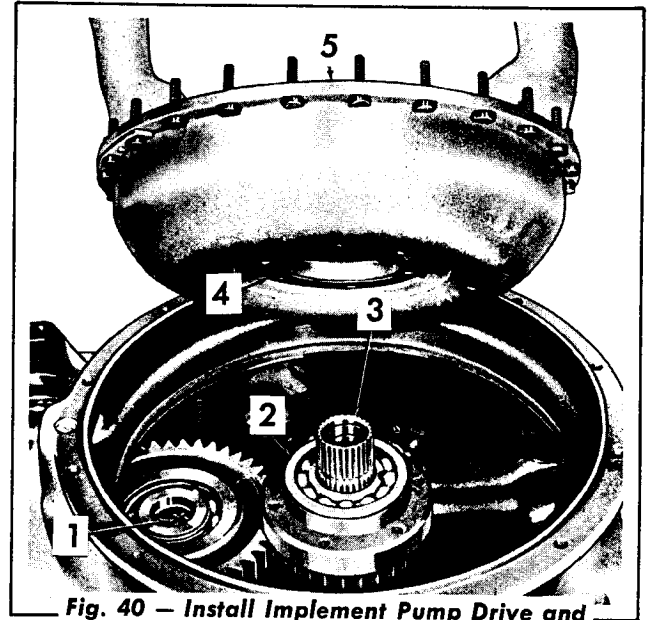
Install Implement Pump Drive and Converter Pump Assembly
